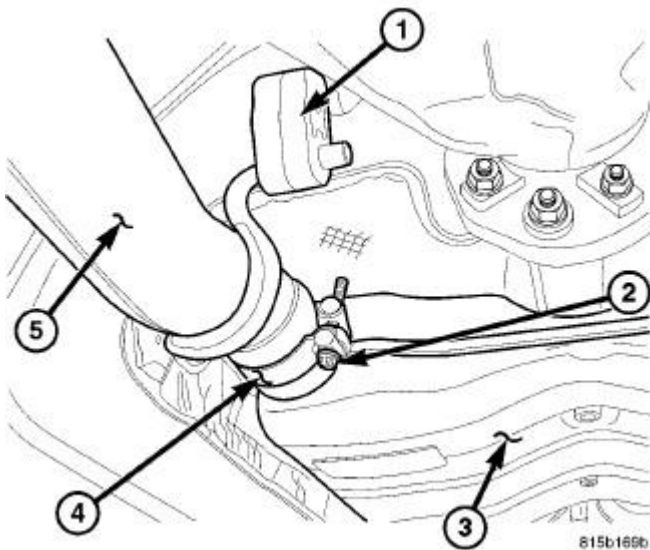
LEFT HAND RESONATOR AND TAILPIPE ASSEMBLY
